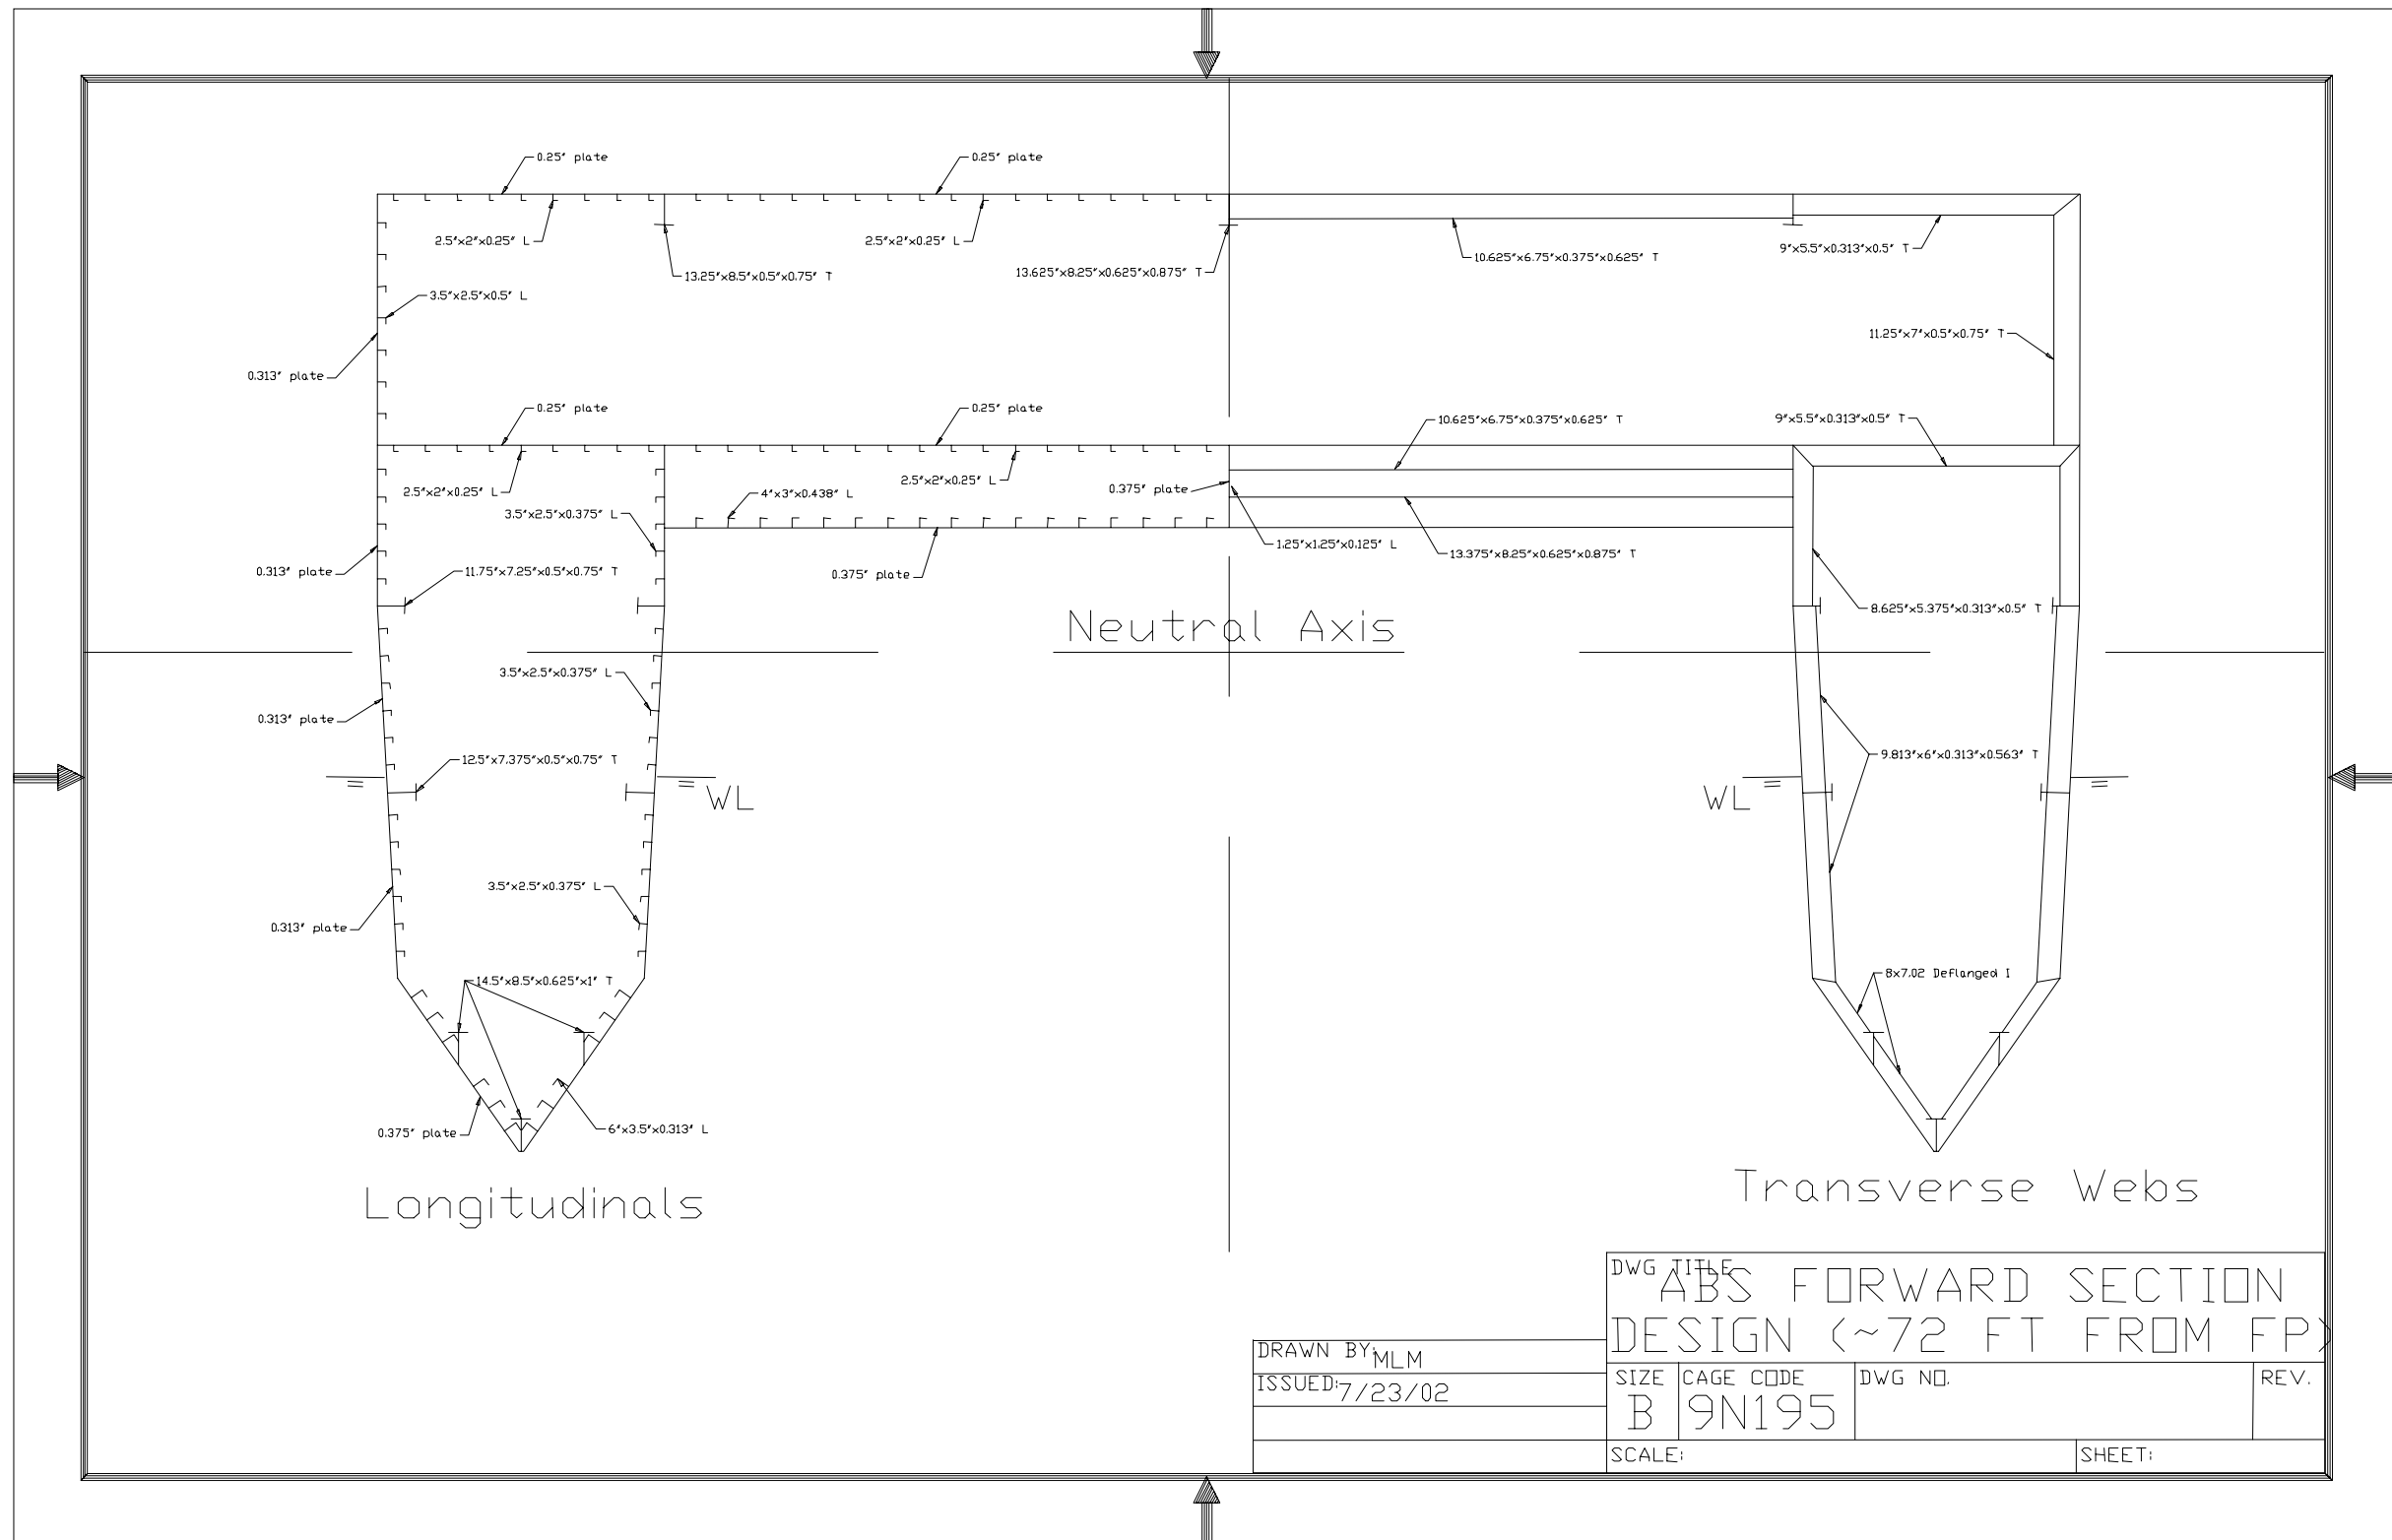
Forward Section (71.7 ft from FP) Structural Design
